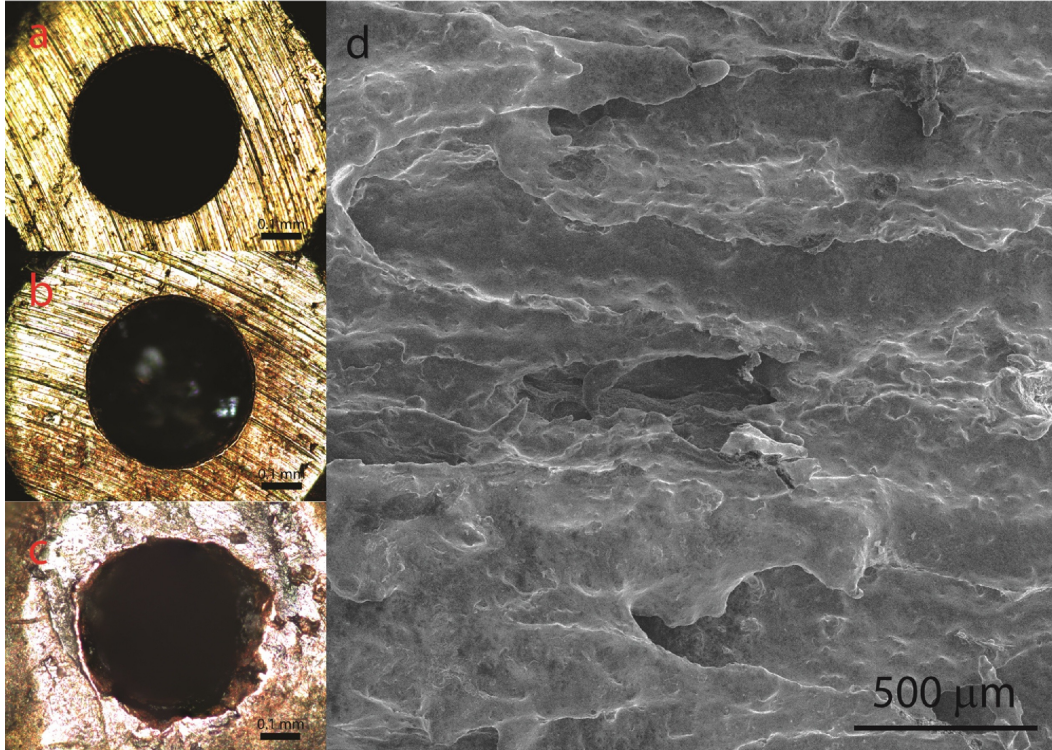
Optical micrographs showing the surface of a 3D printing nozzle before and after printing. (a) Unused nozzle. (b) Nozzle after printing 10 cm of PBT/graphene. (c) Nozzle after printing 1.5 m of PBT/carbon nanotube. (d) Scanning electron microscope image of PBT/graphene composite printed with an abraded nozzle [20].
